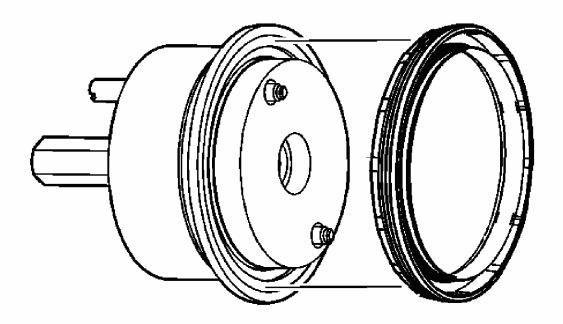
Positioning Rear Seal Onto J 45930-A Crankshaft Rear Oil Seal Installer
